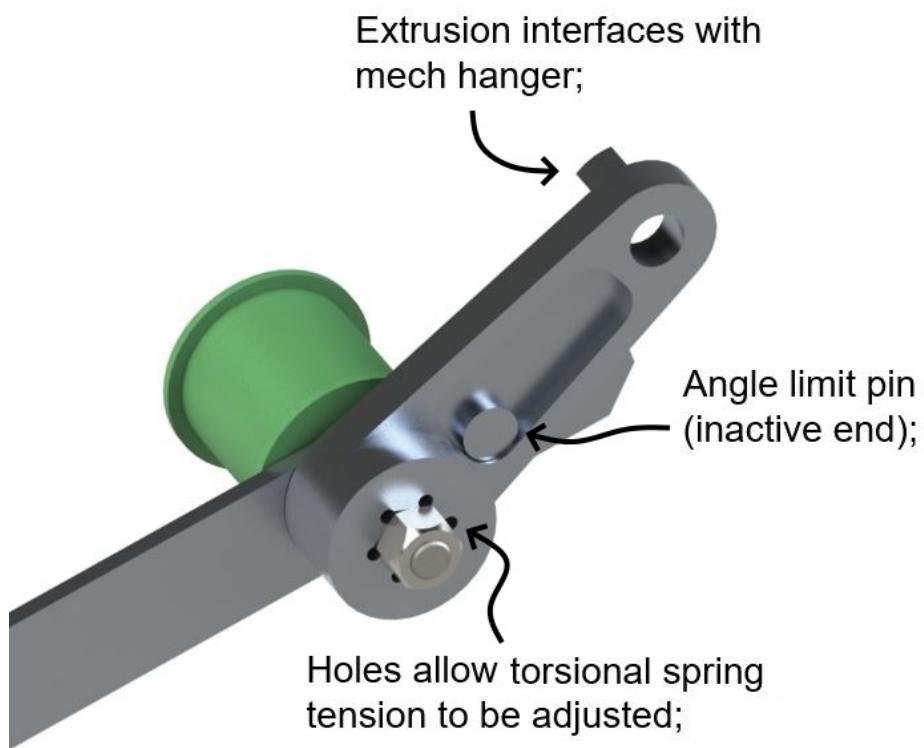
Annotated outside view of the tensioner sub assembly;
